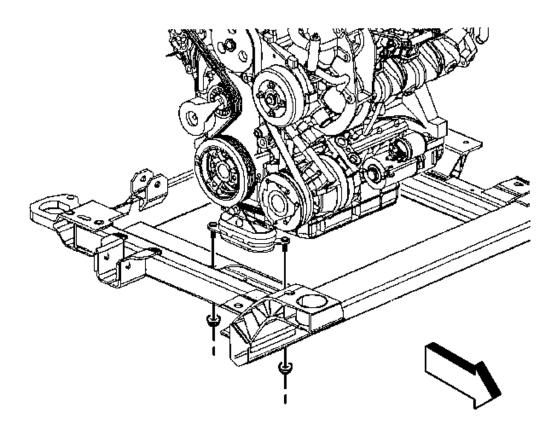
Removing Engine Mount Lower Nuts Courtesy of GENERAL MOTORS CORP.
